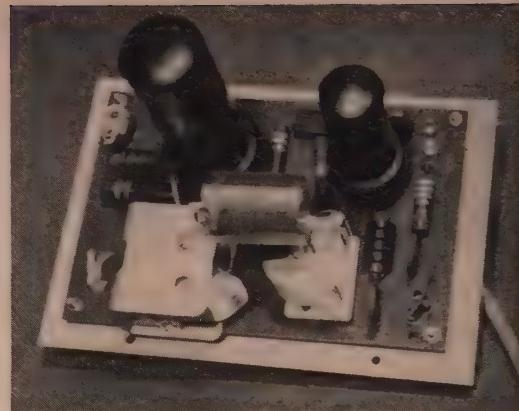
Rear view of etched circuit board. Conventional chassis is eliminated by mounting all components on the 1/16 inch thick laminated phenolic sheet which carries the foil wiring pattern on its opposite side. Condenser shafts extend through both wiring board and front panel.
